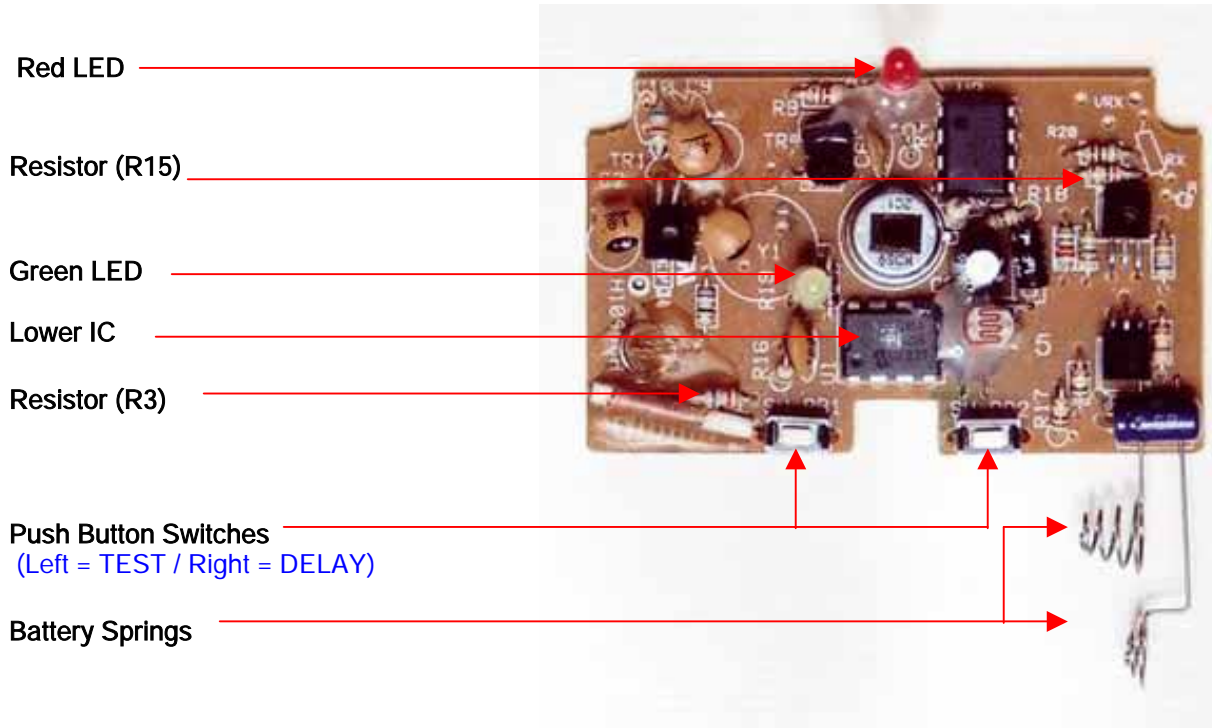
X10 Motion Sensor Board_ Wiring Solder Positions.
